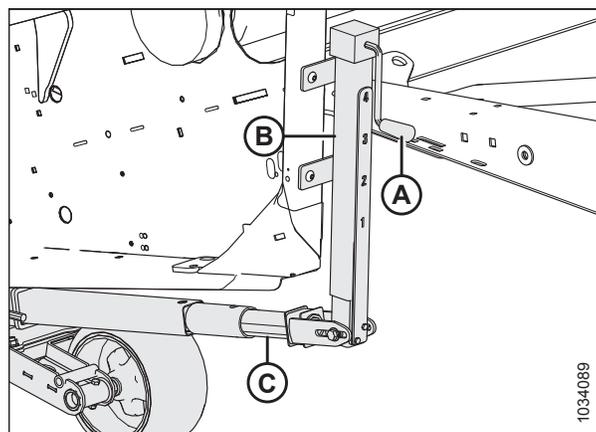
Jack and Outboard Wheel Assembly – View from Rear, Left Shown, Right Opposite
